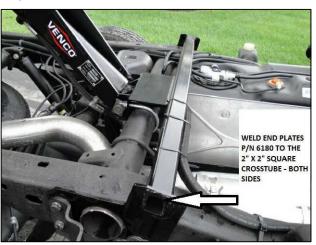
Weld 2" x 2" Crosstube to End Plates
